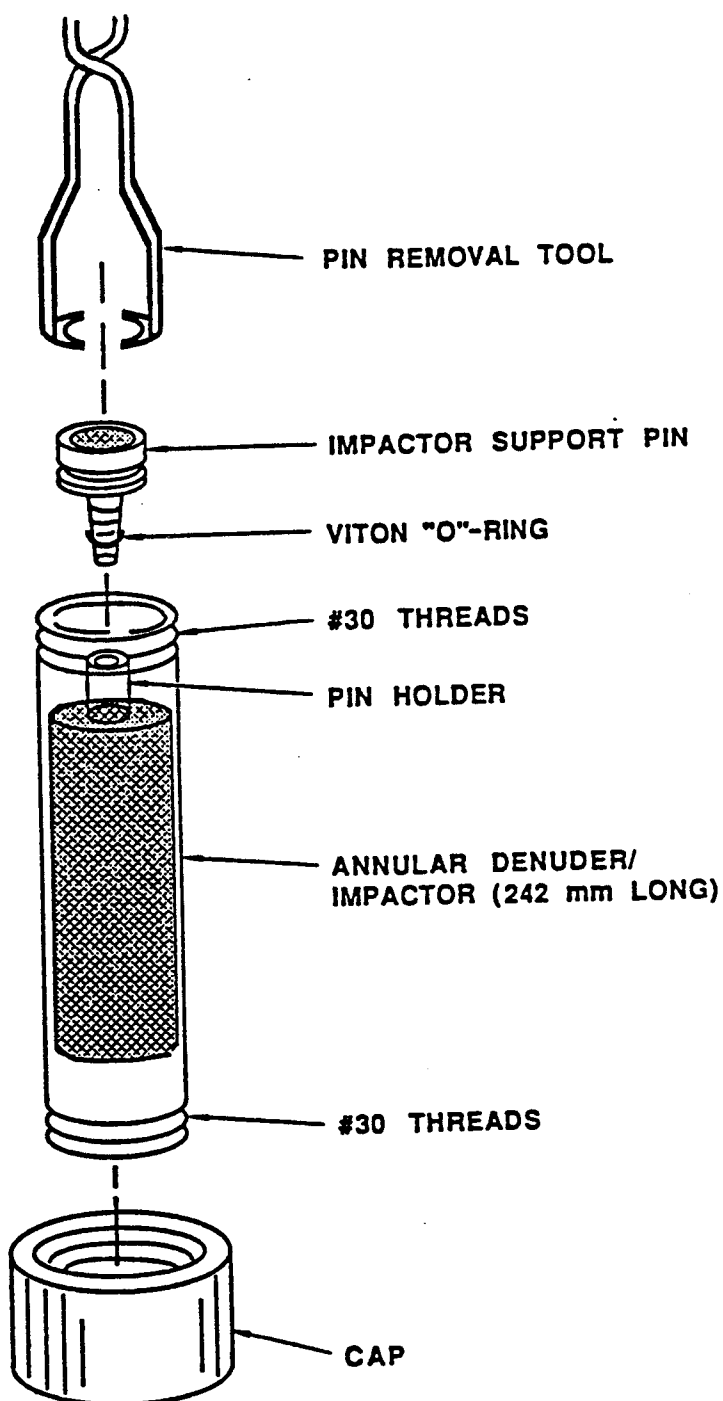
Glass Annular Denuder with Inset Impactor Assembly
